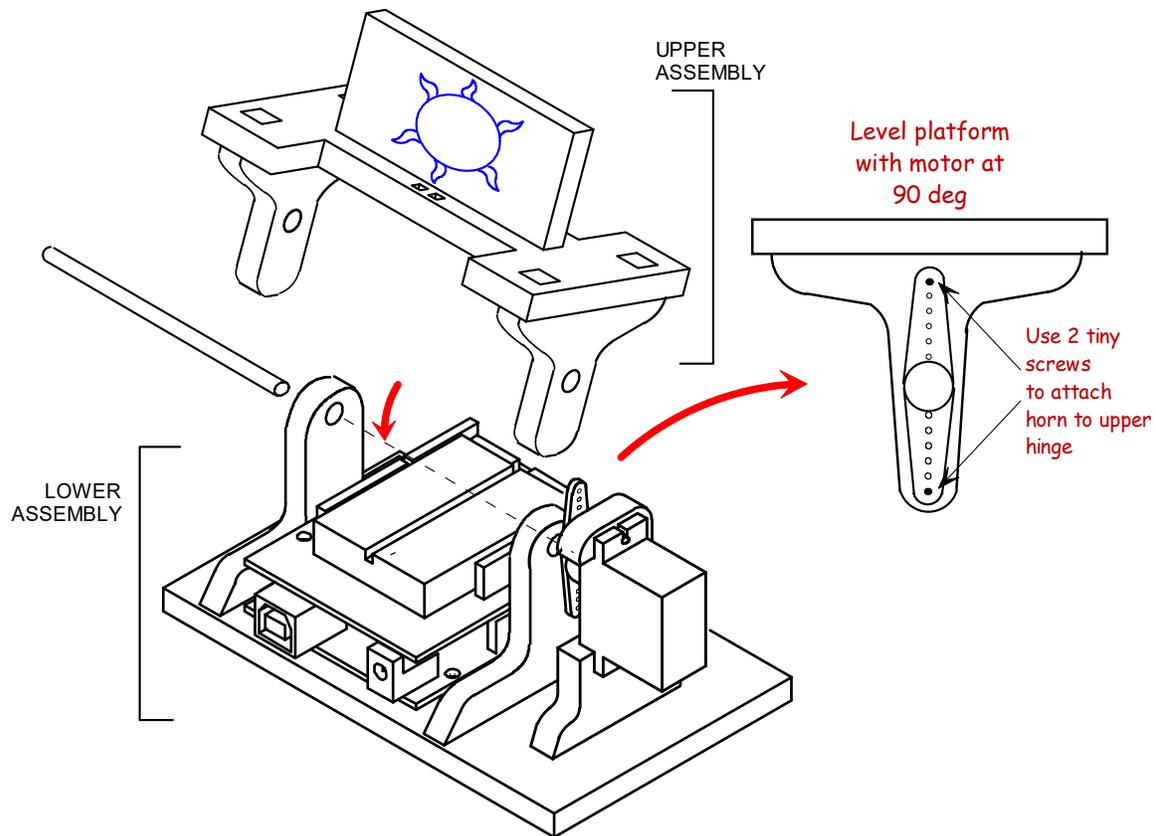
Assemble upper and lower assemblies. Mounting horn to upper hinge
